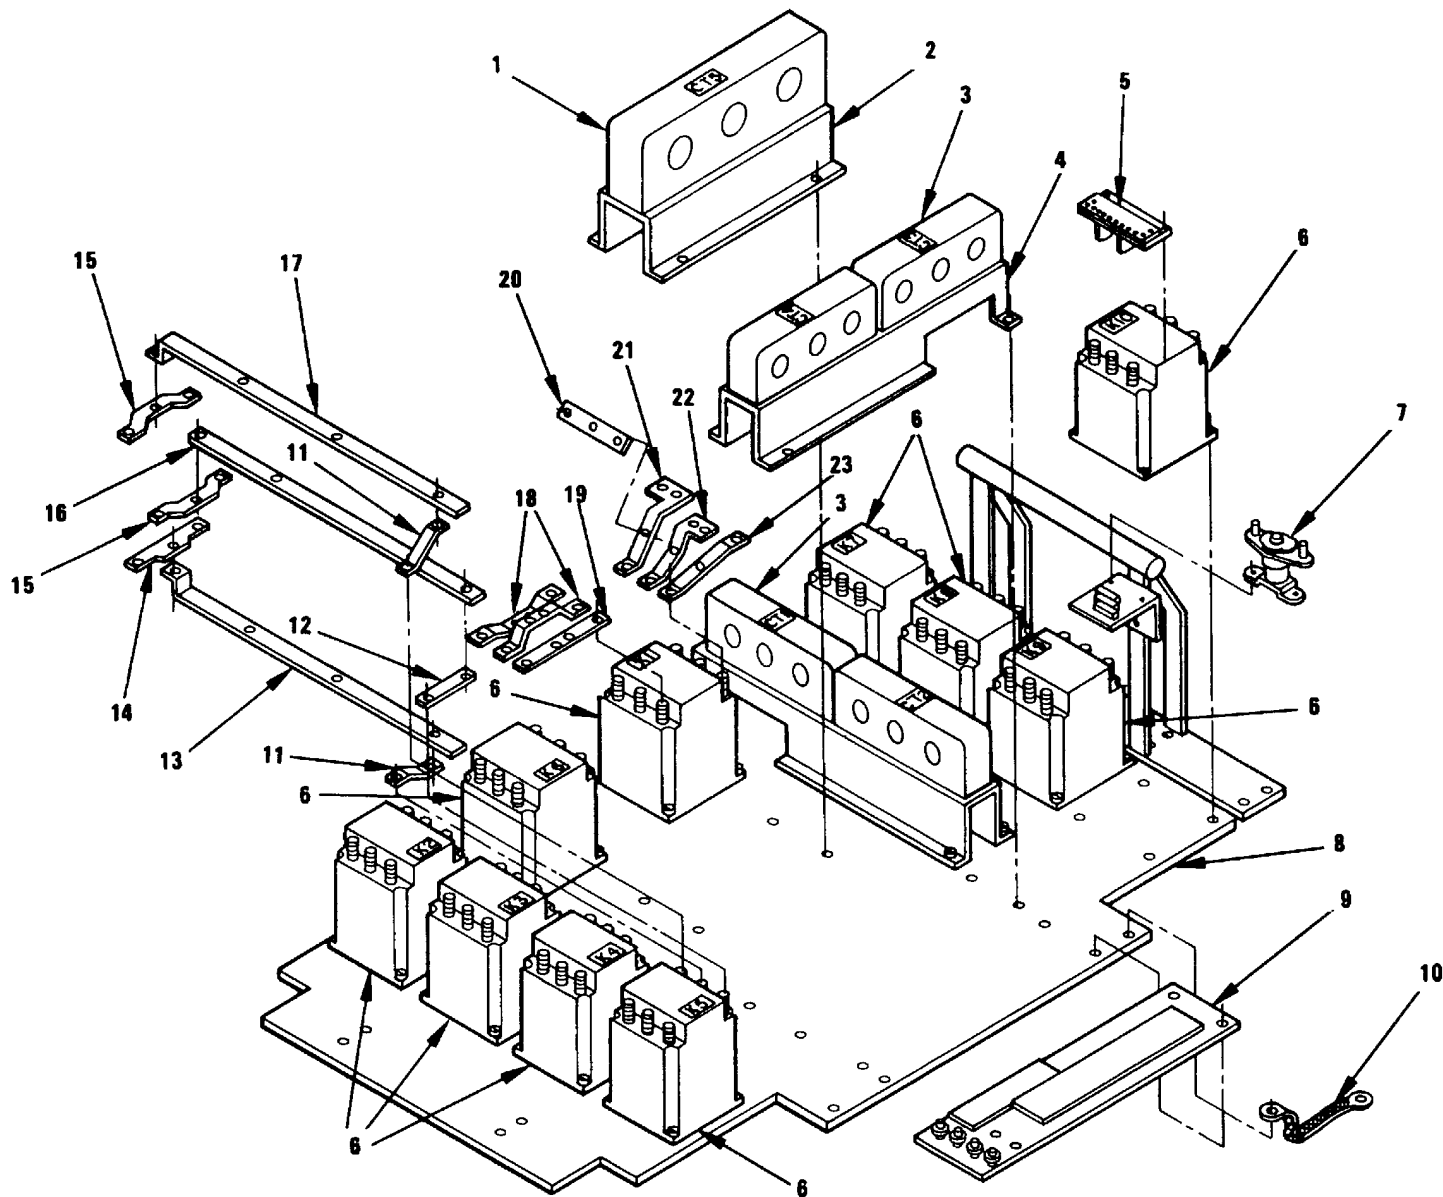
Power Control Assembly and Wiring Harness (Sheet 1 of 2).
